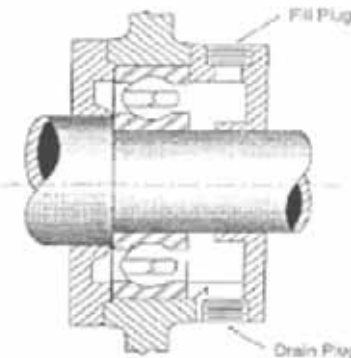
Same-side fill and drain - used with open, single-shielded and double-shielded bearings.
